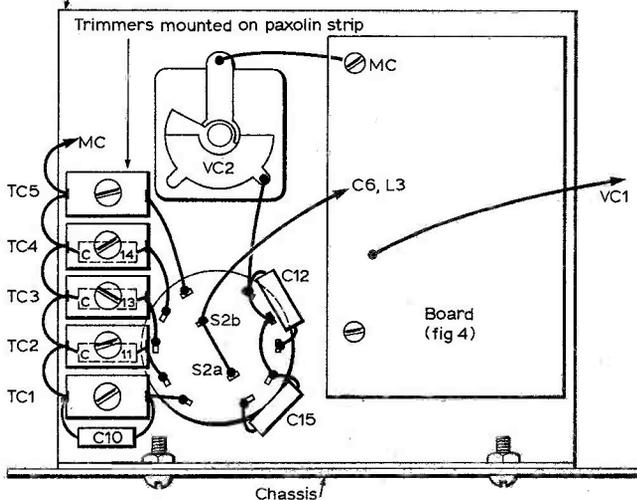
Details of the assembly mentioned in the photograph. It can be finished completely as shown before mounting on the main chassis.
